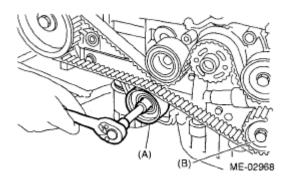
Identifying Belt Idler No. 2 And Belt Idler Courtesy of SUBARU OF AMERICA, INC.
